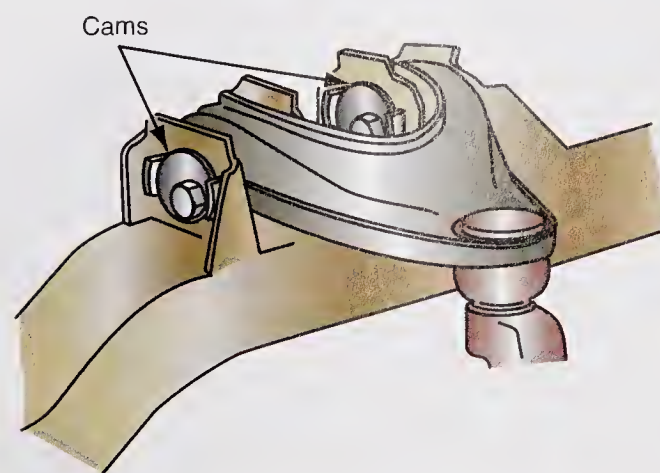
Eccentric cams on the inner ends of the upper or lower control arms can be used to adjust camber and caster.
